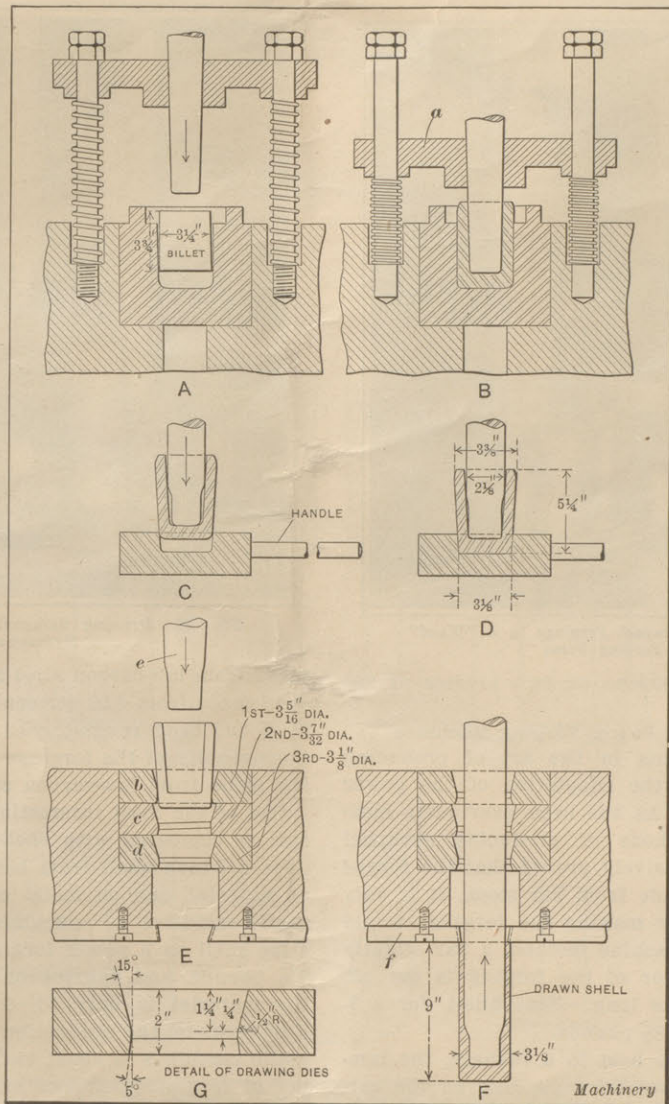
Diagram illustrating Method of piercing and drawing Shrapnel Forgings in a Bliss Power Press
